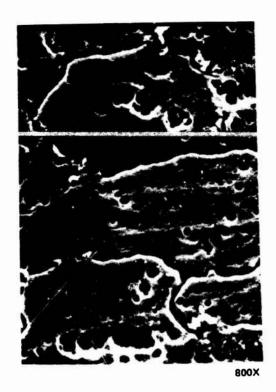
KRAFT PAPER CONTAMINATED FPL ETCHED ADHESIVE WEDGE CRACK FAILURE
